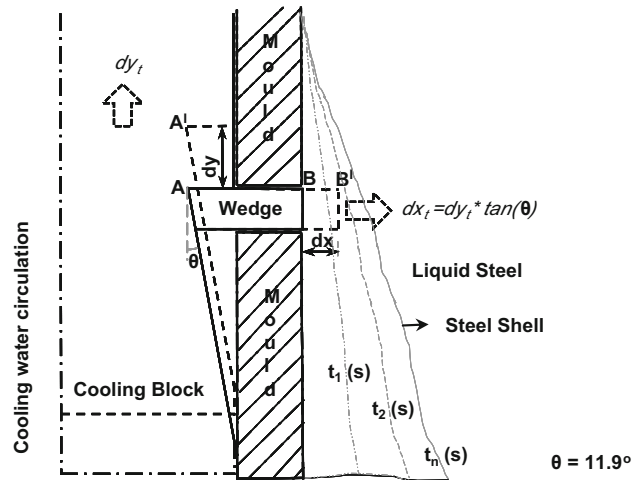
Schematic view of cooling block and wedge assembly inside the mold.
